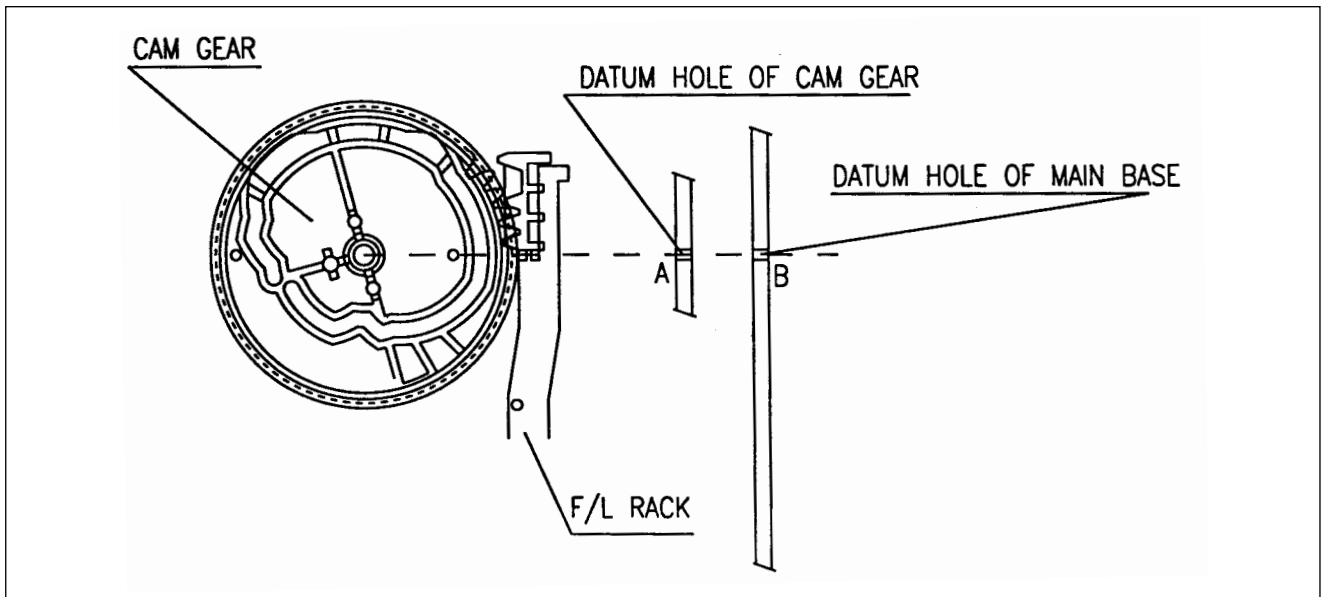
Mechanical Checks/Cam Gear and F/L Alignmen
